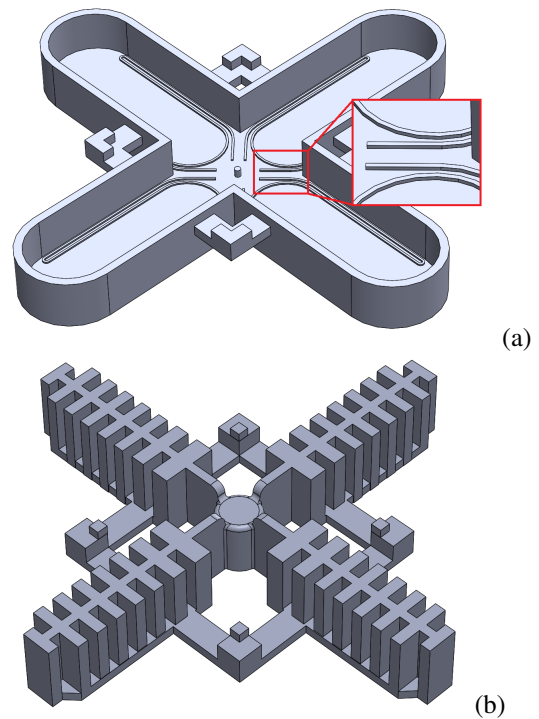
3D modeling representations of the molds that were printed to cast the robot. (a) The primary mold, initially filled with liquid elastomer, with an inset showing the embossed channels that create the sensor channels. (b) The channel mold that is placed in the primary mold to create the pneumatic channels in the robot.
